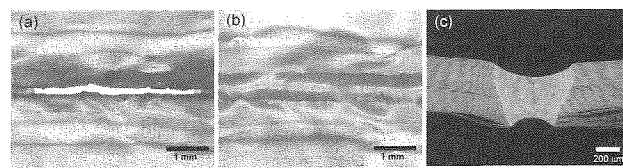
Results of copper foil lap welding. (a) appearance of weld bead with conventional single spot, (b) appearance of weld bead with beam mode control and (c) cross section of (b).
